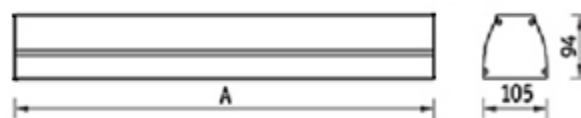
Overall dimensions of the lighting fixture assembled in a line (without caps)
